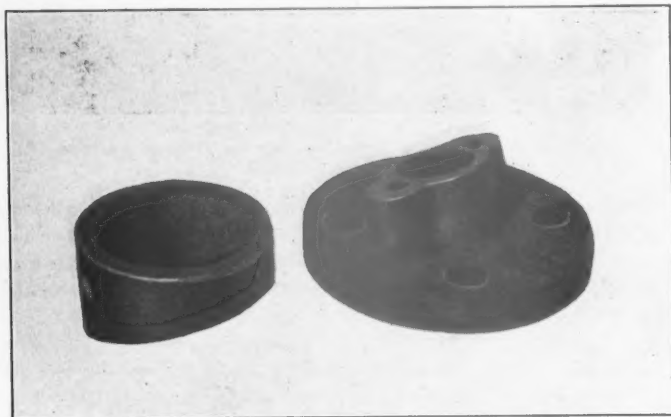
Throttle Rod Stuffing Box and Jig Used in Drilling Stud Holes
